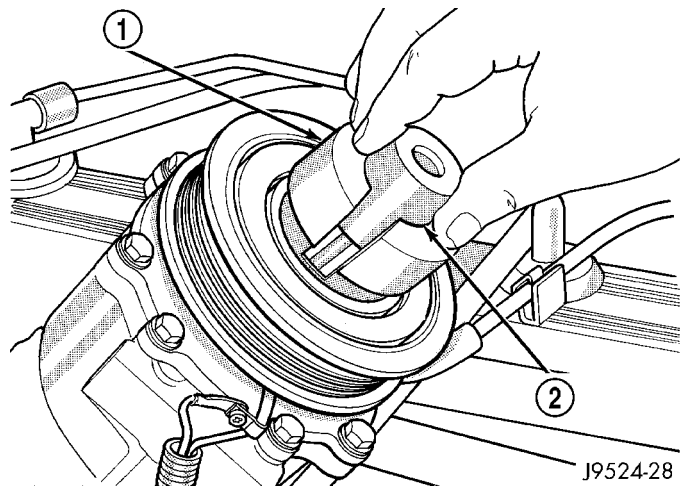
SHAFT PROTECTOR AND PULLER - Typical
